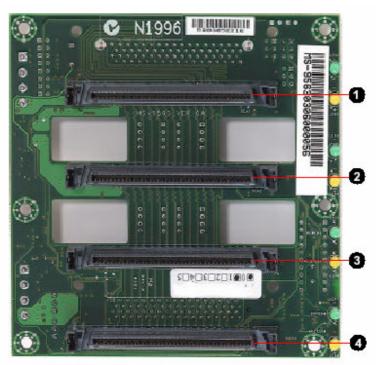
Ultra320 SCSI Hard Drive Connector Layout
